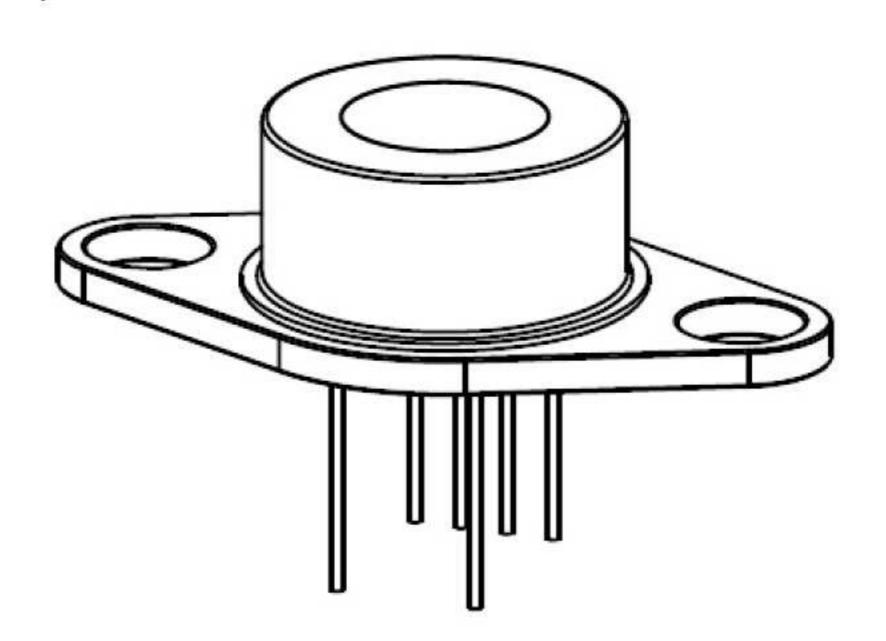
External Dimensions 2 (Unmarked dimension tolerance ±0.1mm)
